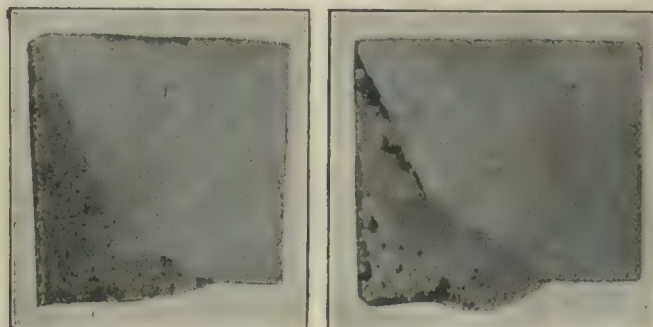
WELDS SHOWING POOR AND GOOD FUSION
